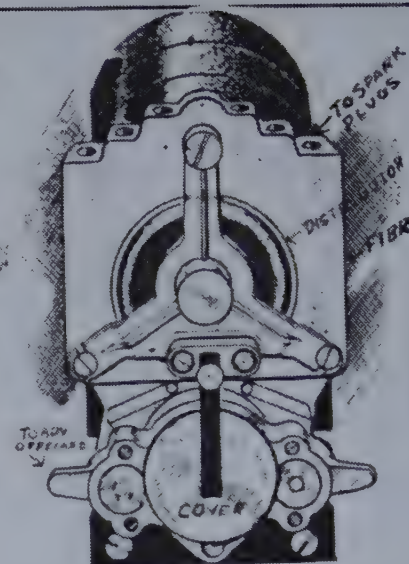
End view of a High Tension Magneto with the Contact Breaker or Interrupter Enclosed
